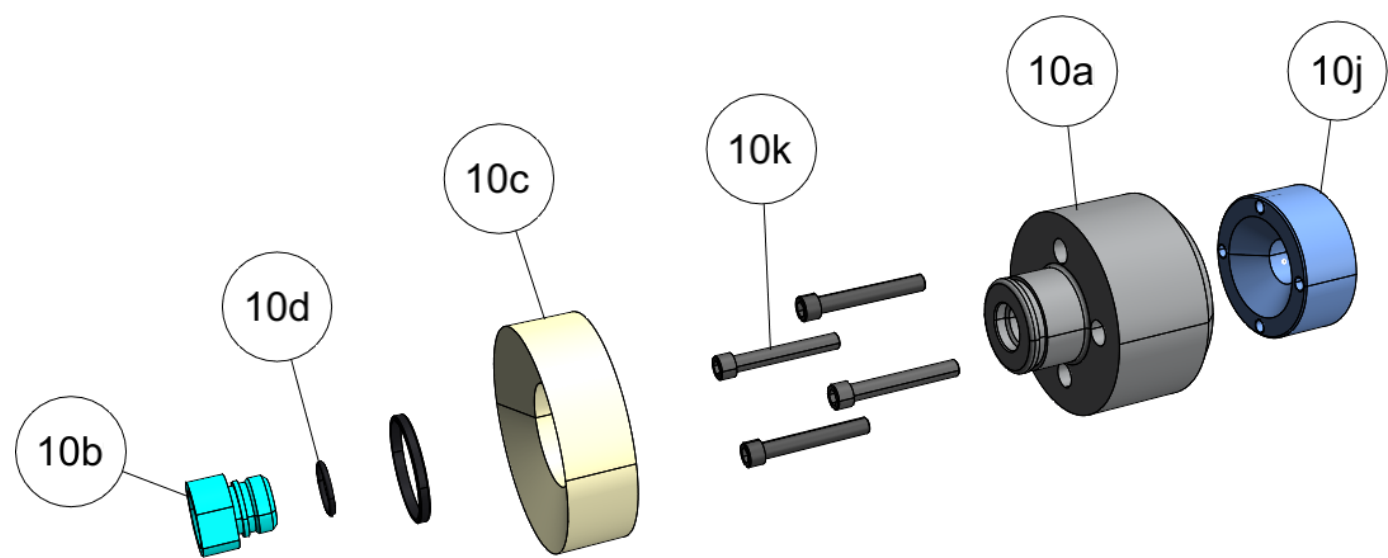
12.0” OD Casing Cutter Piston Assembly
